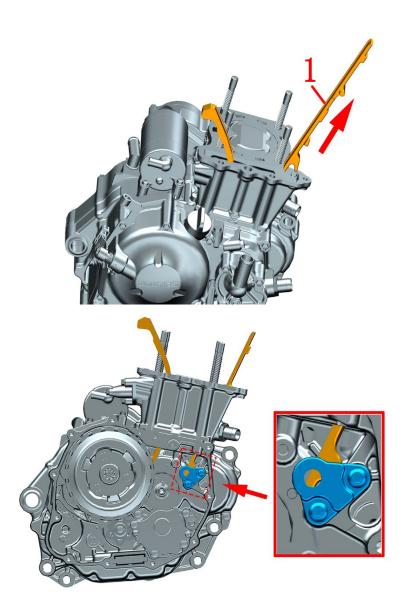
CYLINDER BLOCK		Remove the guide bar	CHK	(0)
